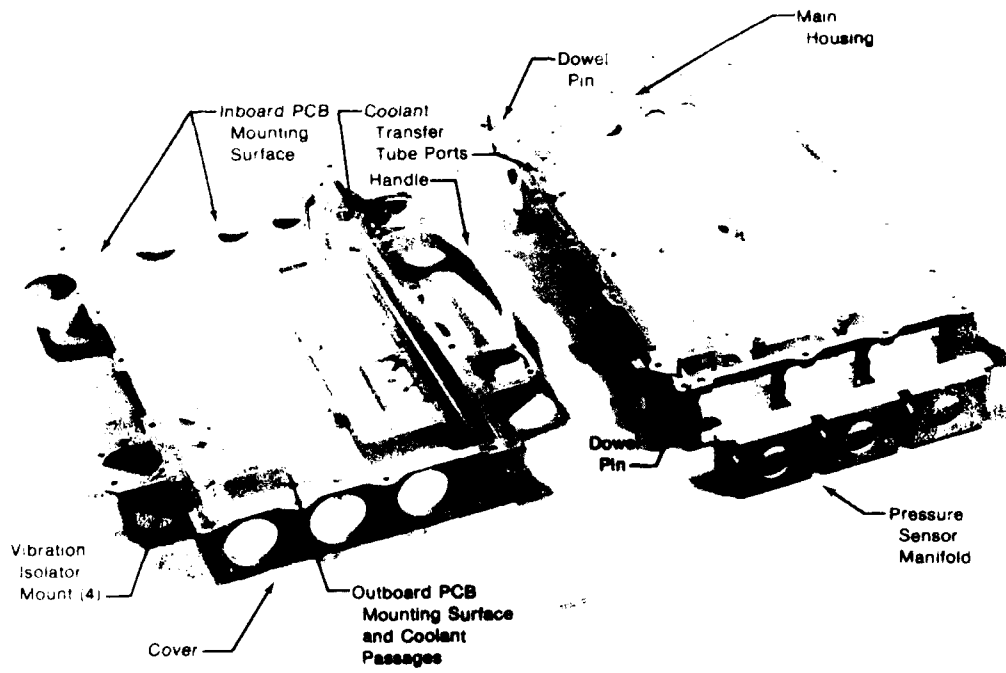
ENGINE-MOUNTED CONTROL HOUSING COMPONENTS
